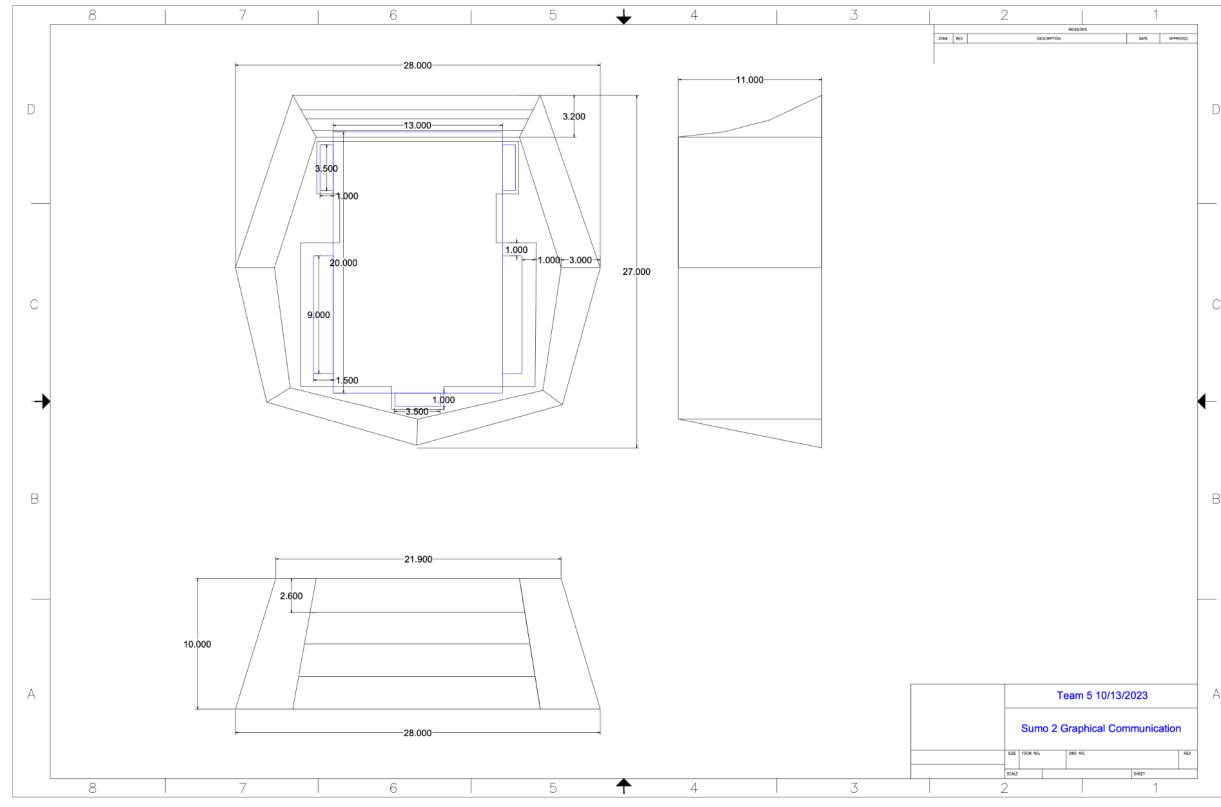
, Shell AutoCAD drawings; Made to help translate rough sketches into a to-scale drawing that could be implemented and 3D printed (Team 5, 2023)
